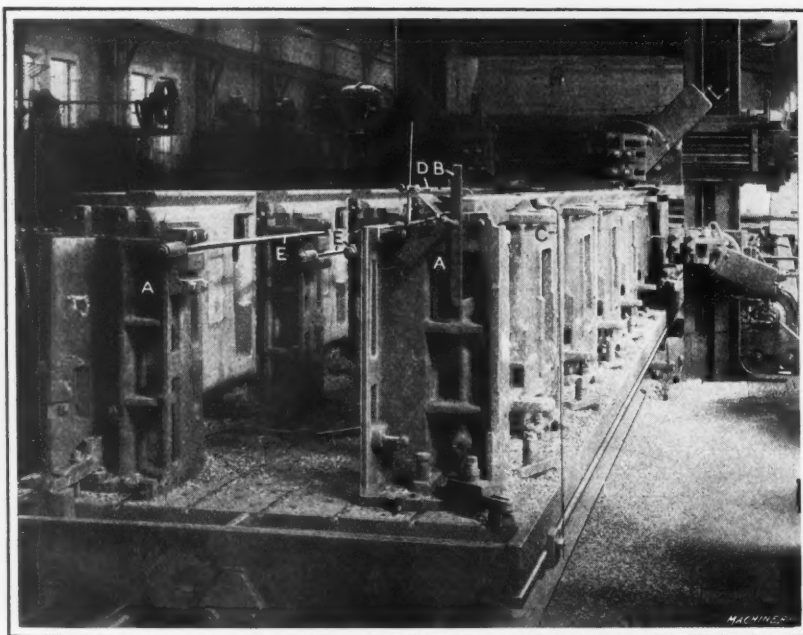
Machining the Knee Bearing and All Finished Side Faces on Milling Machine Columns
